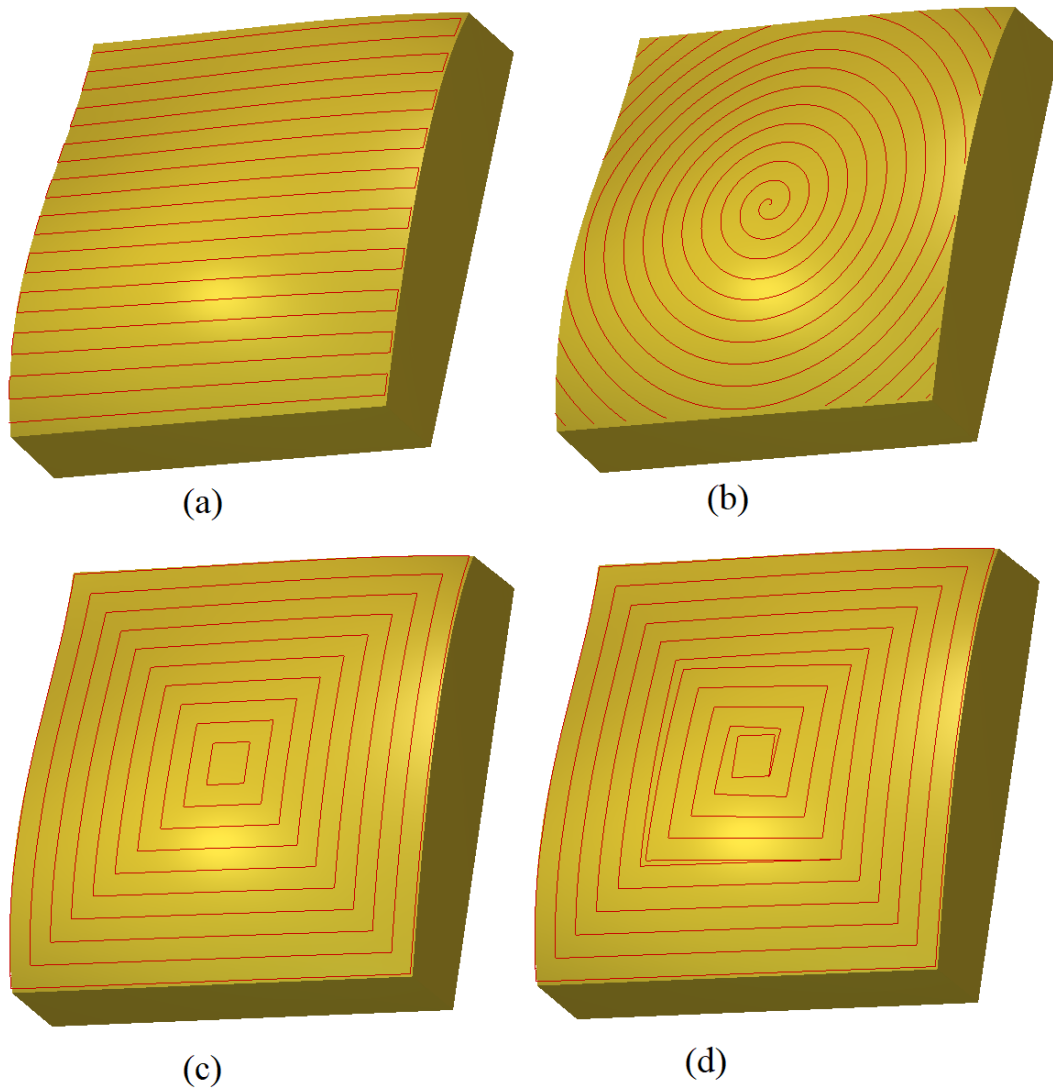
Area clearance tool path strategies, (a) Raster tool path, (b) Spiral tool path, (c) Offset tool path, (d) Offset-Spiral tool path
